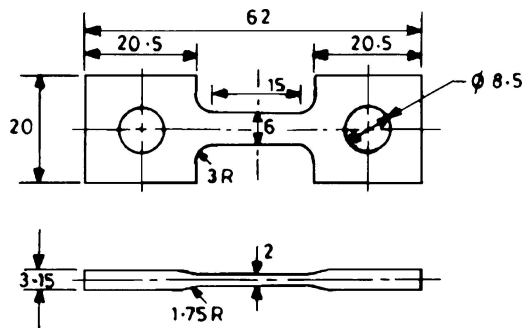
Dimension of tensile specimen used for the mechanical tests.
